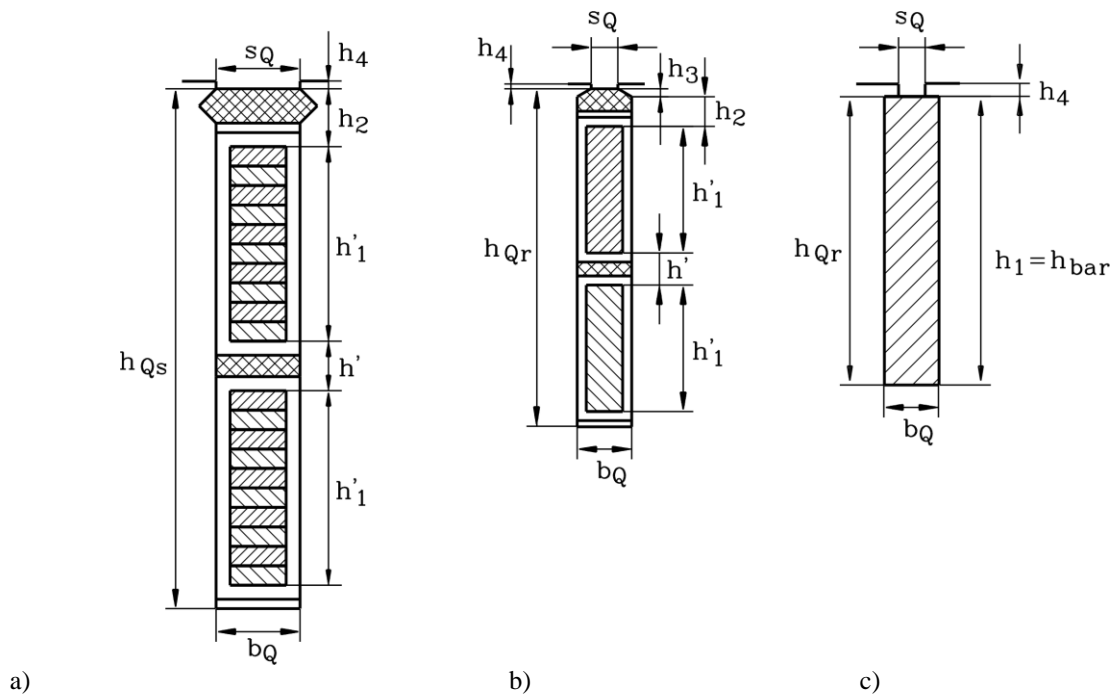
a) Two coils (two-layer winding) in one slot for 6 kV, 500 kW induction machine, b) Wound rotor induction machine: rotor slot design c) Cross section of deep rotor bar in slot
